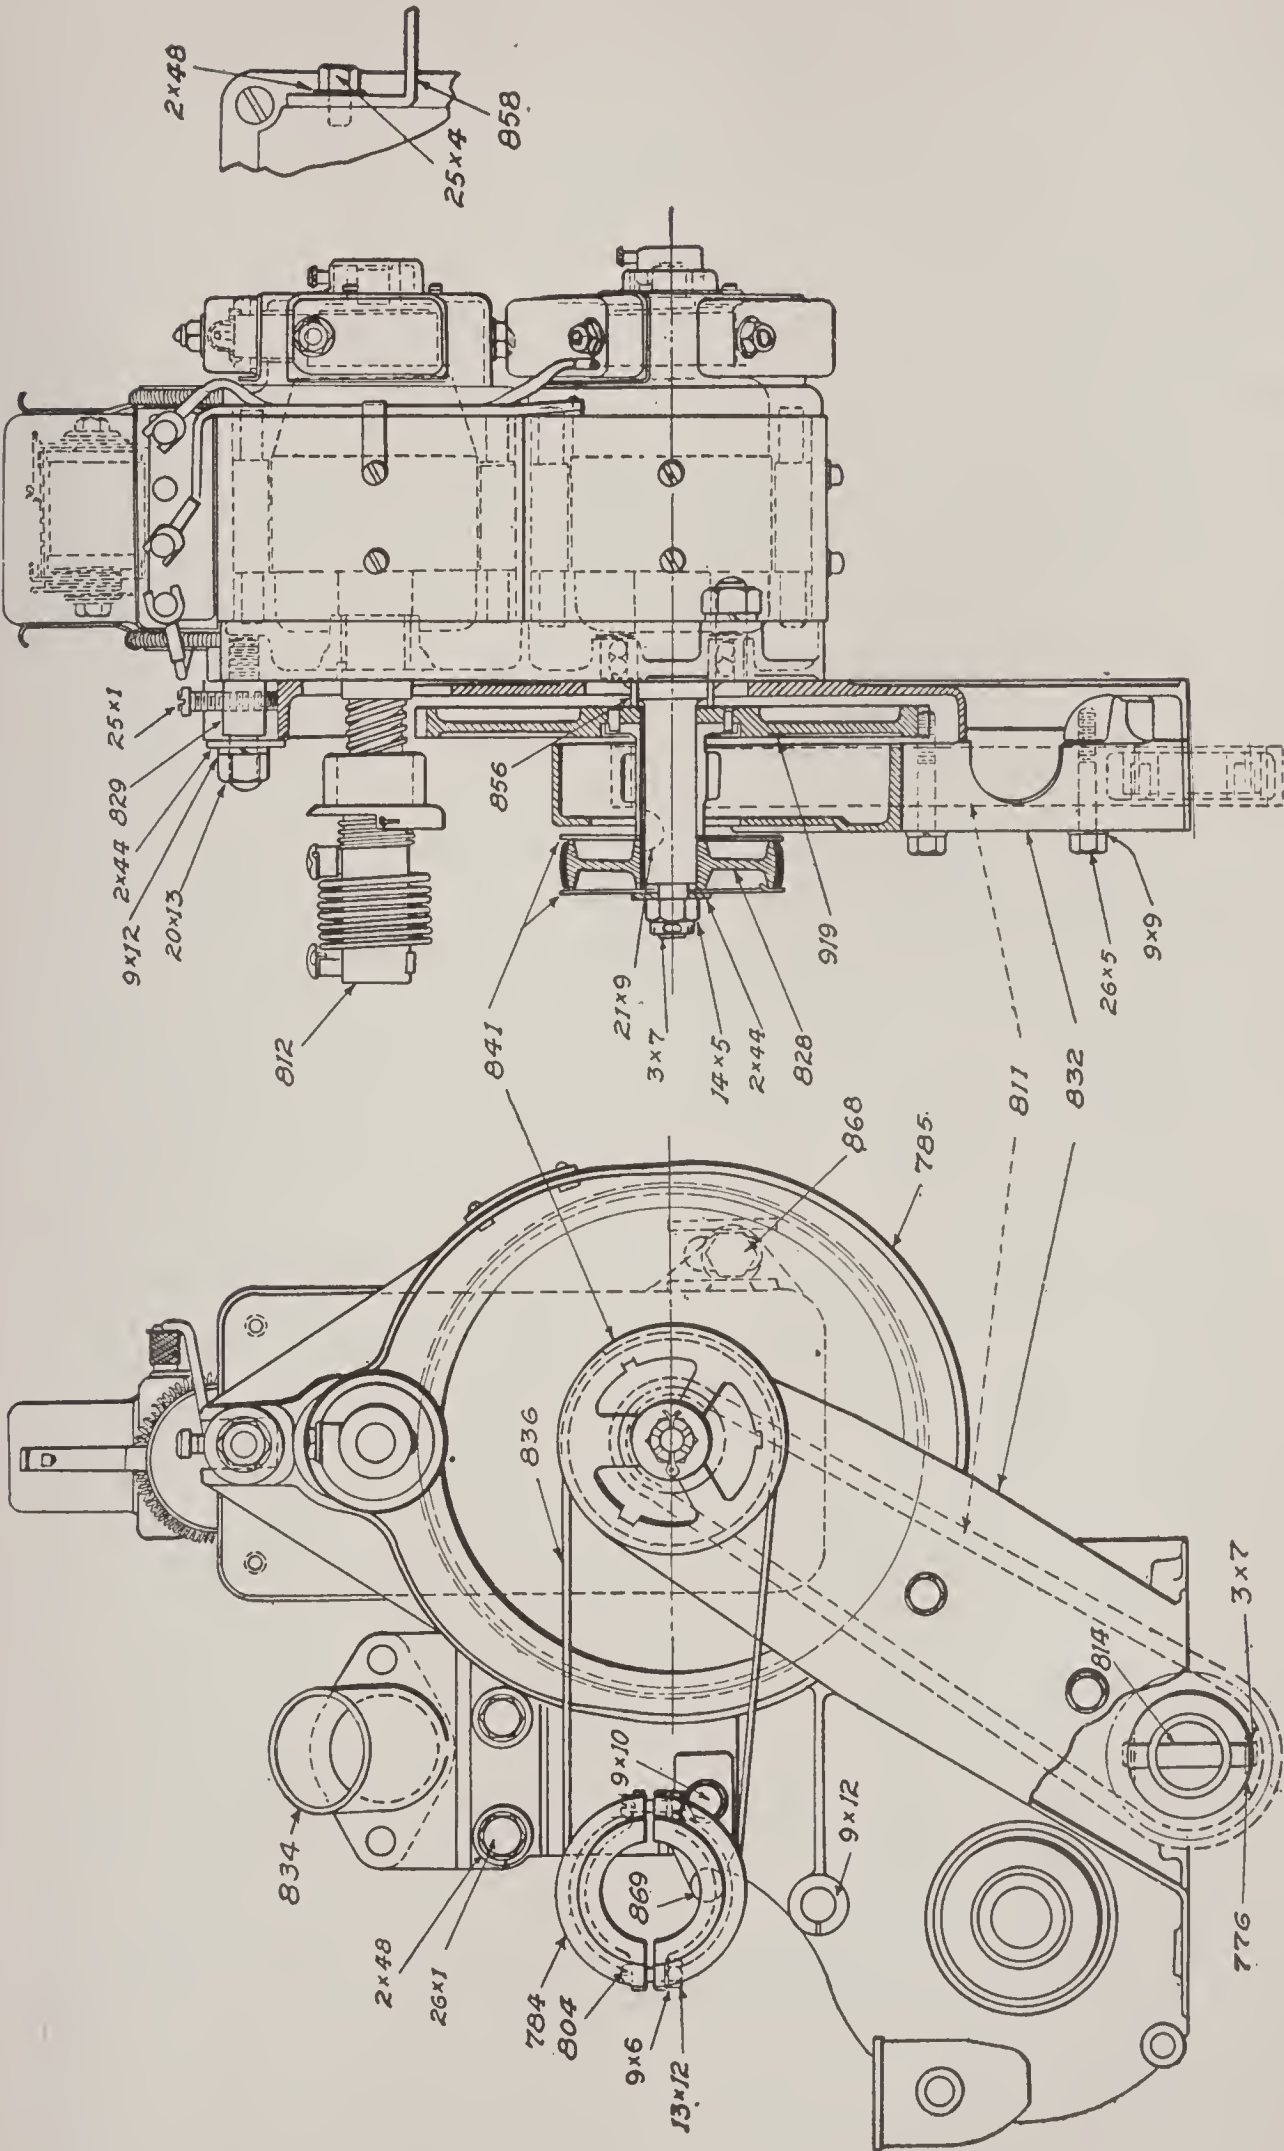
Heinze-Springfield Starting Motor and Generator Unit Installed on Ford Engine
